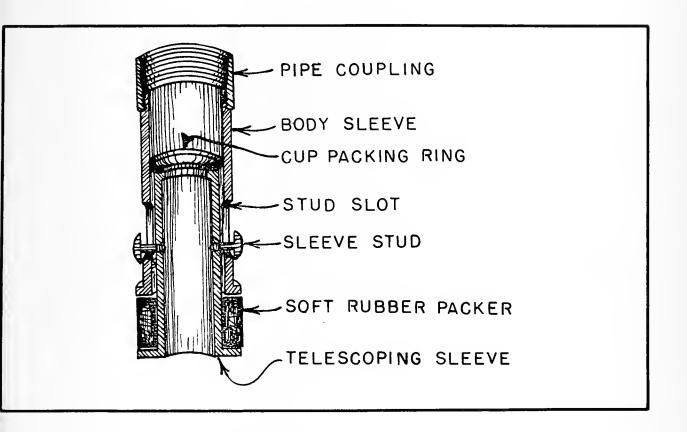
Detail of Packer Assembly for Use in Connection with a Short Liner Pipe.
